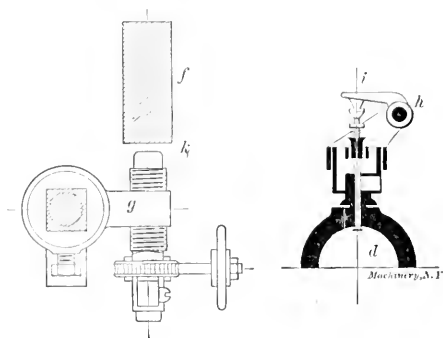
Charge Regulator and, Fig. 5. Fuel Valves of the Altman Engine.
